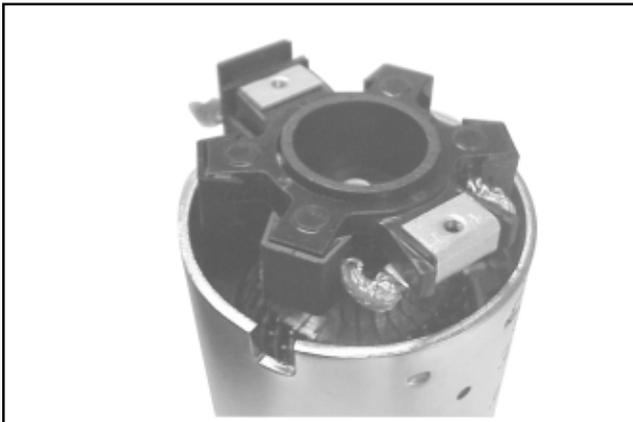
Installing Brush Holder Assembly with Supplied Tube.
